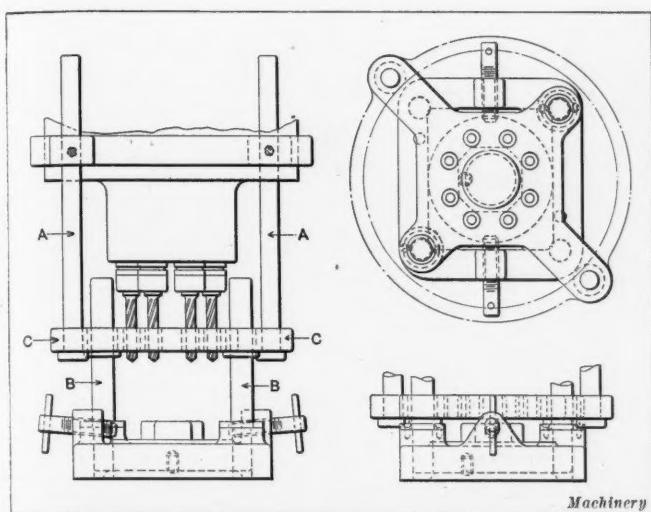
Multiple-spindle Drill Head provided with Jig-plate that is lifted with Head when Spindle of Drilling Machine rises in order to facilitate Removal of Work from Fixture
